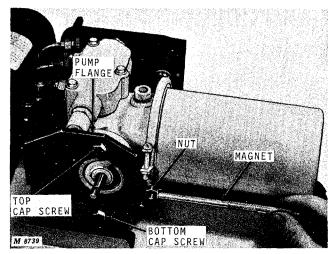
Installing Lower Pump Flange Cap Screw-90-Degree Unit
